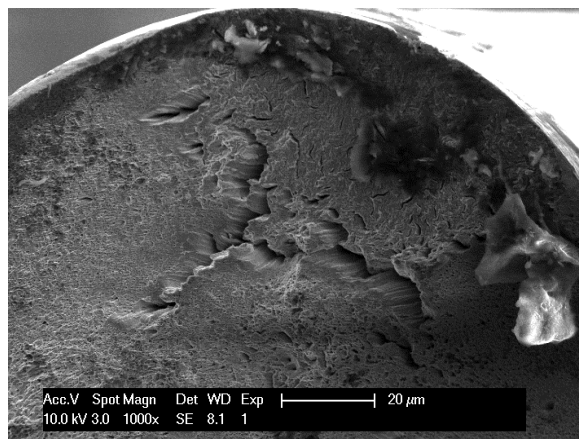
Secondary cracks at the fracture surface.
